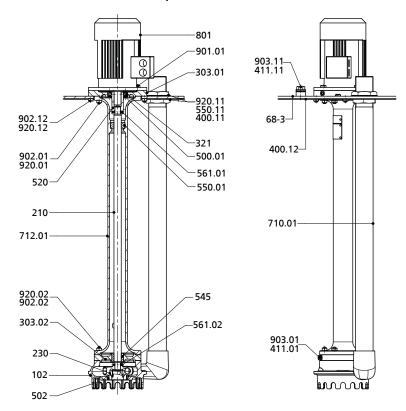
General assembly drawing of MK, MKA - installation depth 1000 mm
